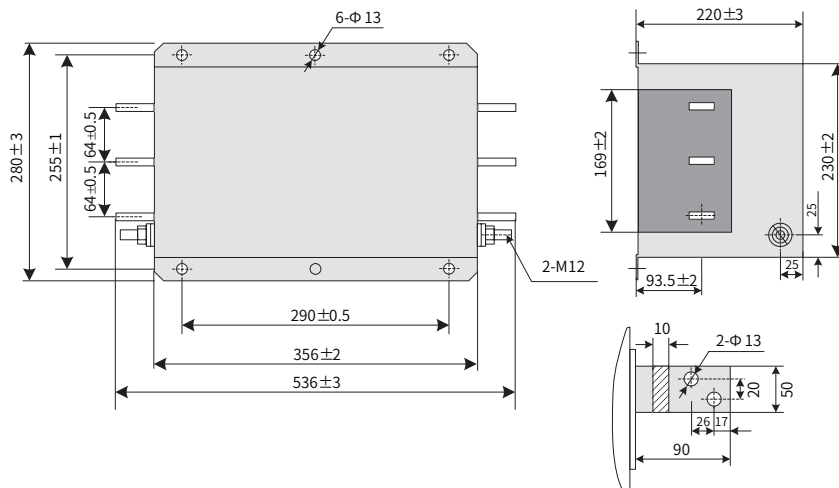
Dimensions of Jianli series 1000 A filter (unit: mm)
